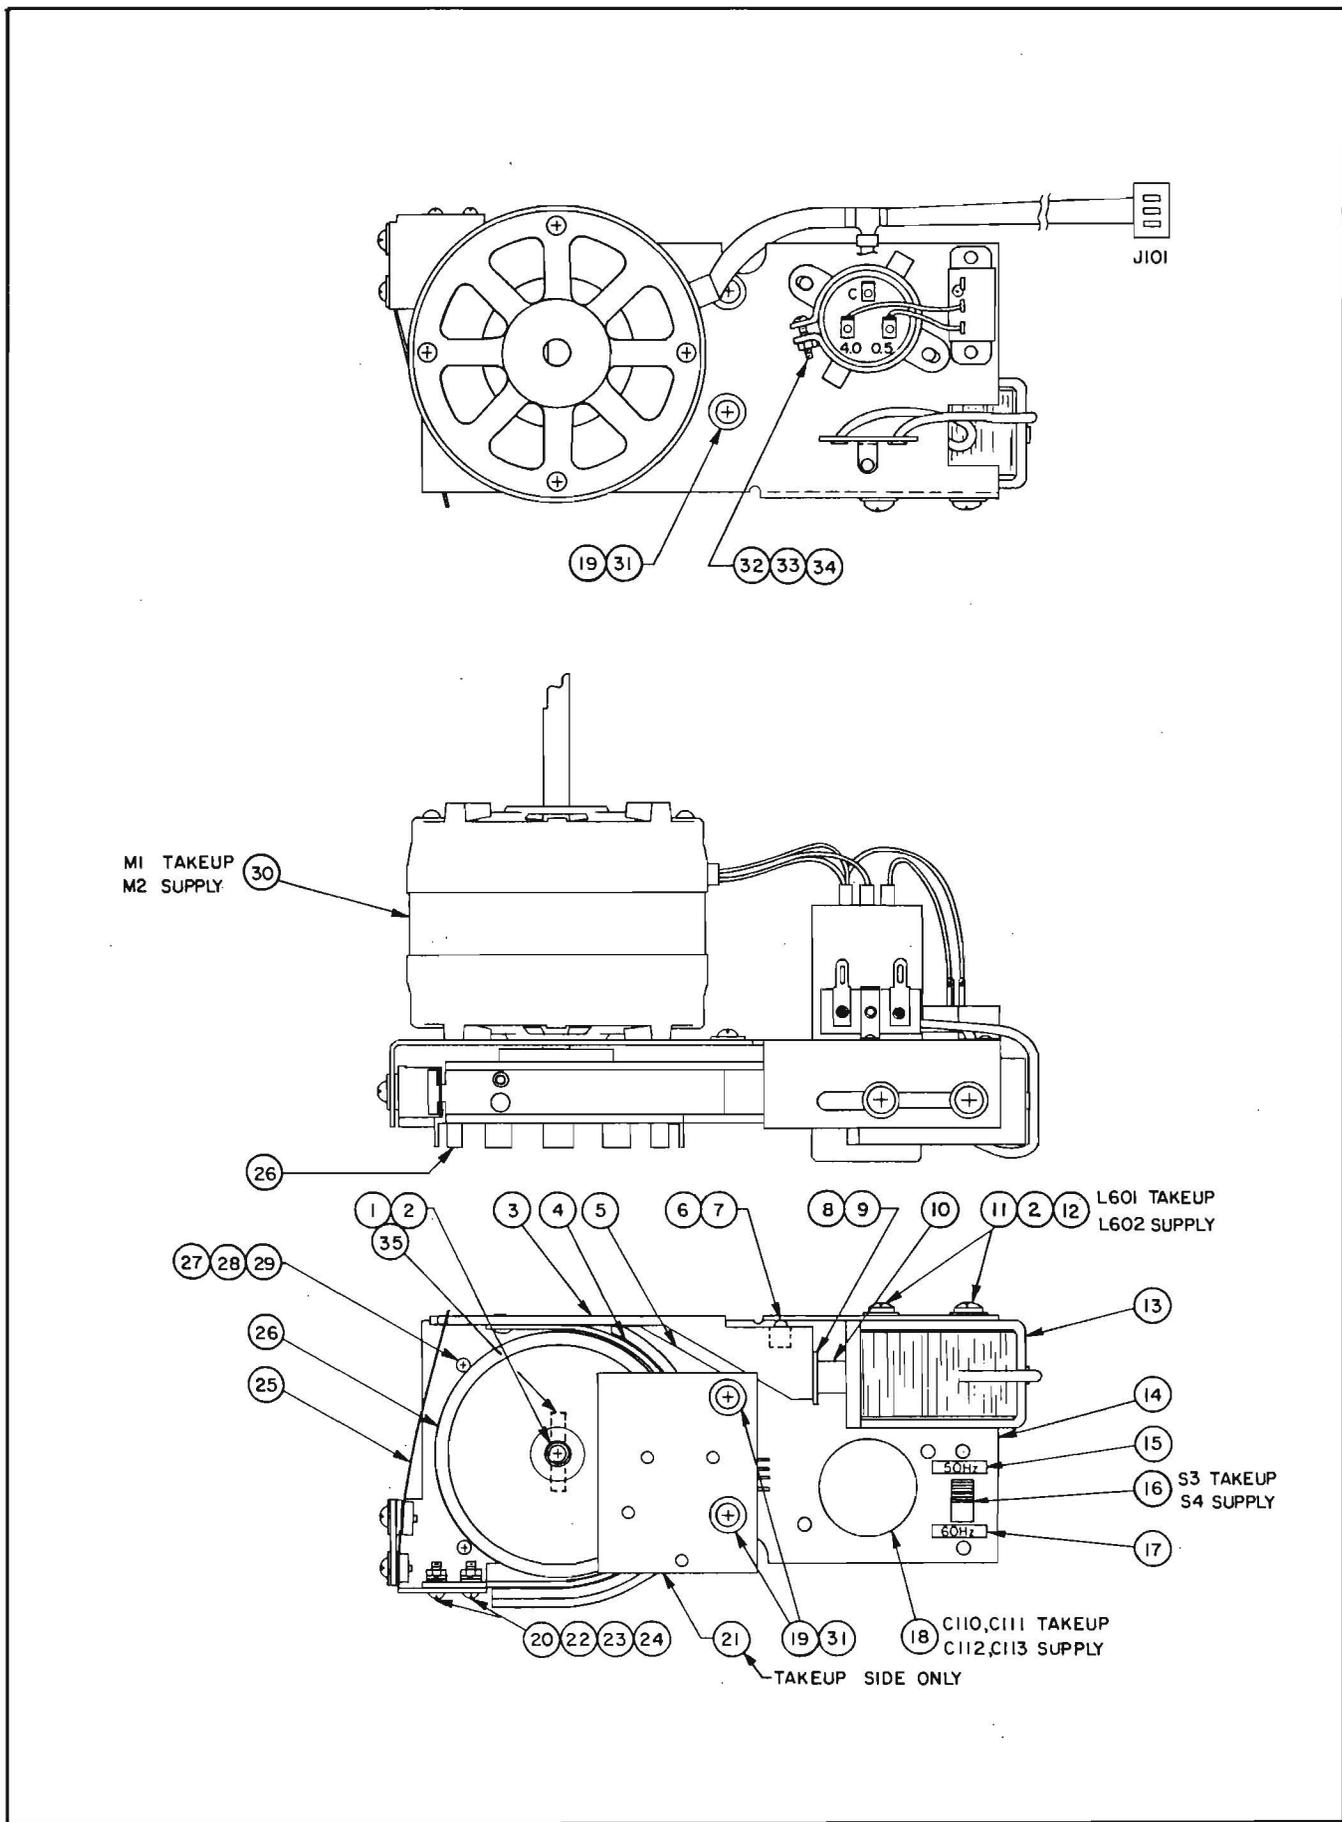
Open-Reel Spooling Motor/Brake Assembly
